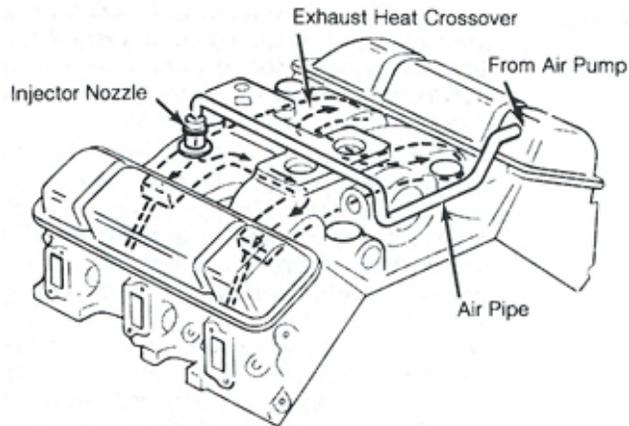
Air injection Into Intake Manifold Exhaust Heat Crossover
